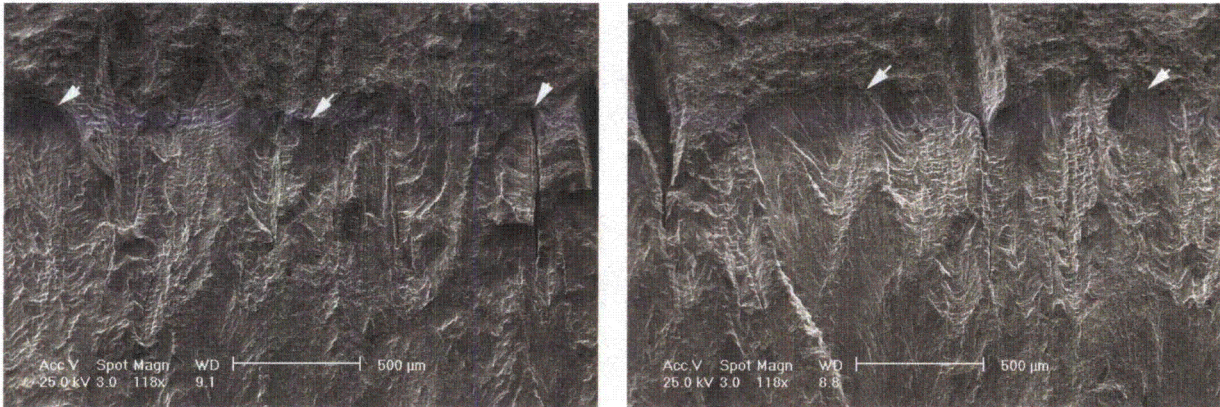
Fracture surface of specimen A152-TS-4 at the end of the test (arrows). Crack advance is from bottom to top.
